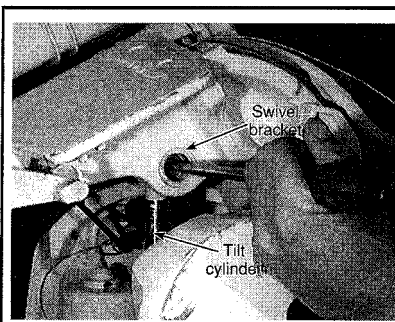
then carefully drive the upper tilt pin from the swivel bracket and tilt cylinder...
